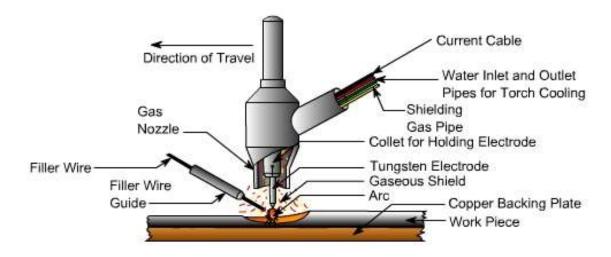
Principle of TIG Welding. [Ref: 1]
